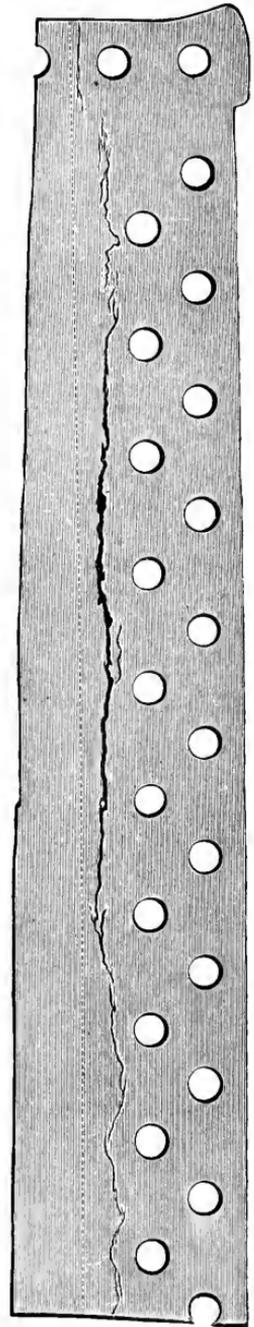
SECTION OF A BOILER PLATE WITH A LAP-JOINT CRACK.
